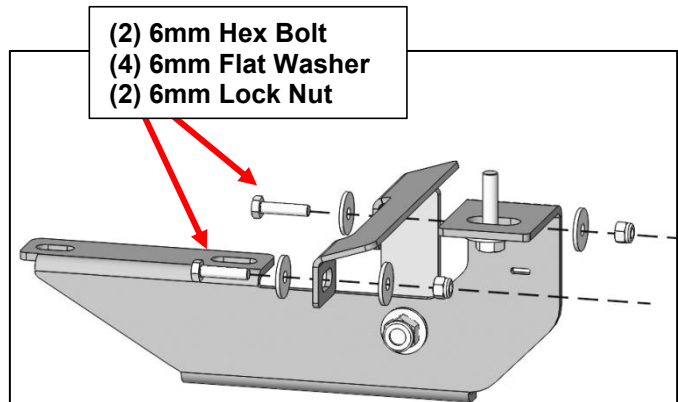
Attach PS Front Mounting Bracket to threaded insert, then attach Support Bracket to Mounting Bracket and pinch weld holes
